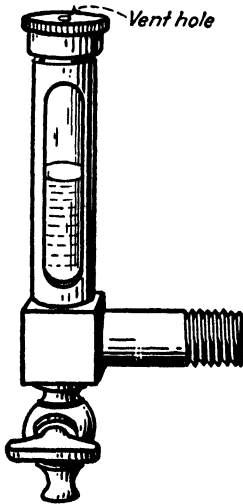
Single-connection gage glass serves on bearing oil reservoirs.
